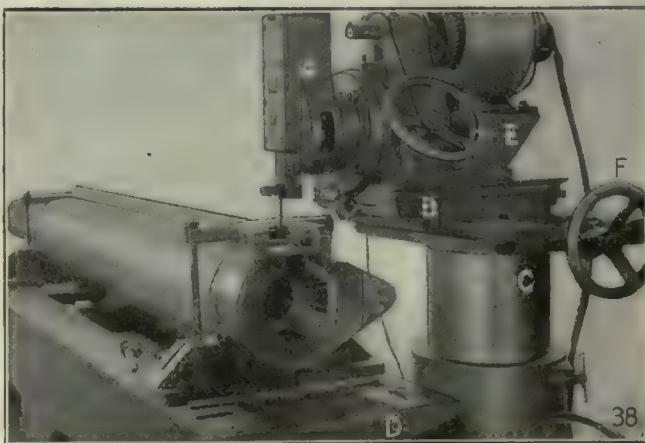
SPECIAL SLOTTING MACHINE FOR FINISHING EXTRACTOR HOLE
